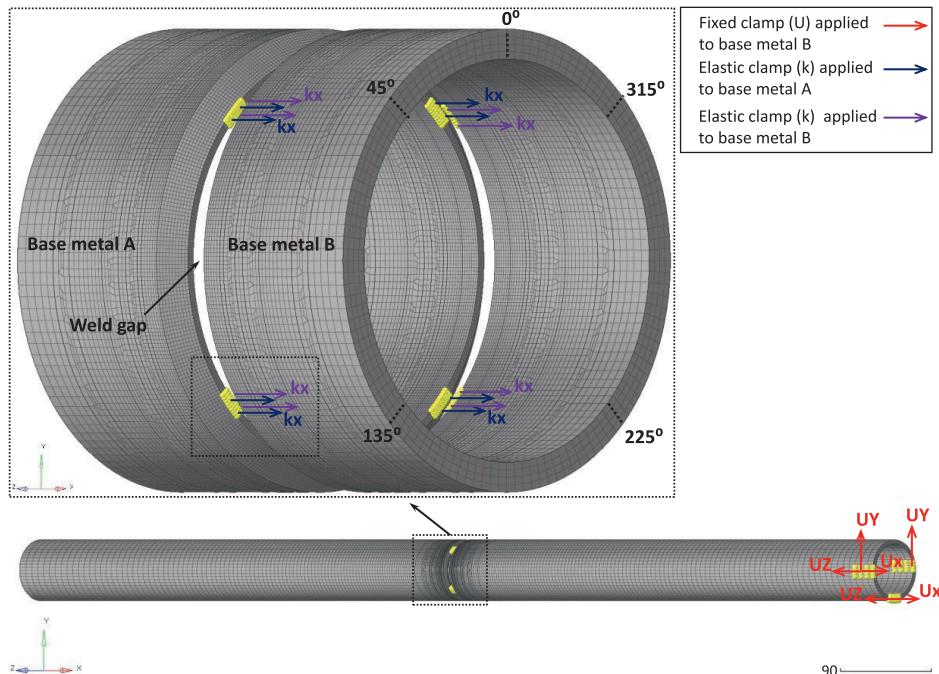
Finite element model of welding specimen showing boundary condition.
